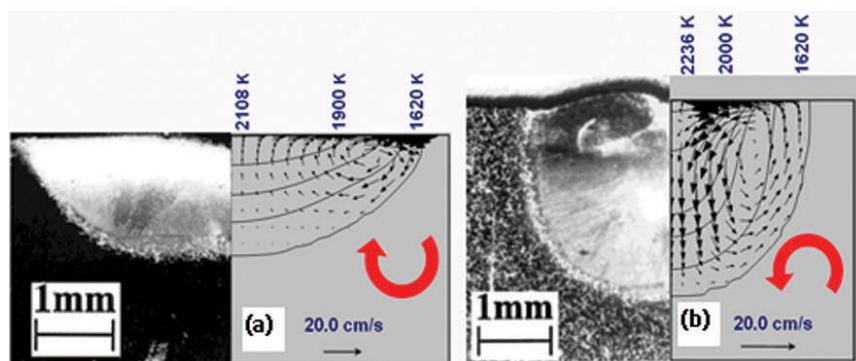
Experimentally determined and theoretically calculated weld pool geometries in a 15-mm-thick, high-speed steel plate spot laser welded for 5 s. The welds had 20 and 150 ppm sulfur on the left and right sides, respectively (Ref. 11).
